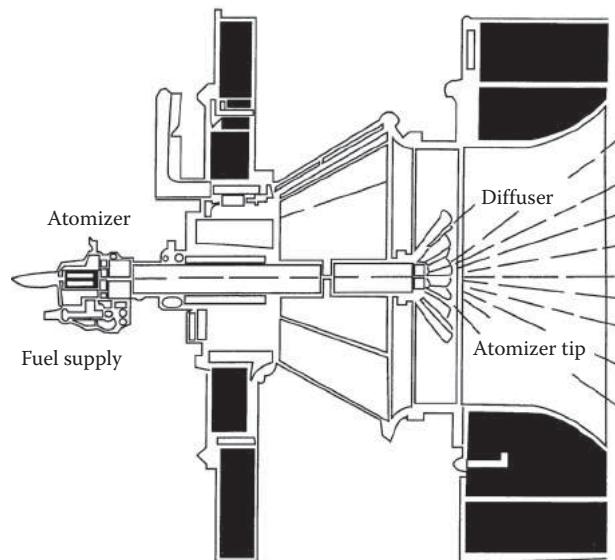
A mechanical atomizing burner, one of many possible nozzle designs for a liquid injection incinerator. (From Combustion Engineering Superheater, Inc.)
